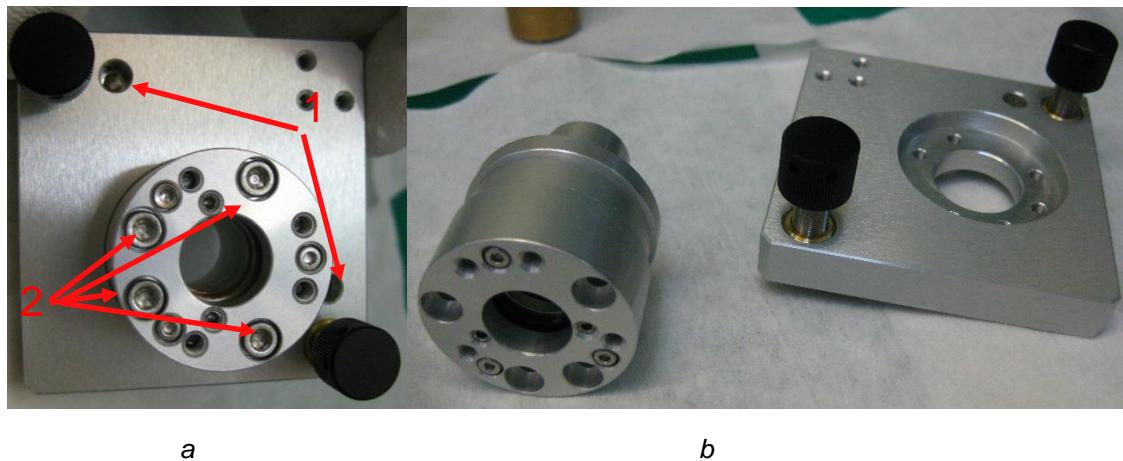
Rear mirror (RM). a) holder; b) its disassembly
